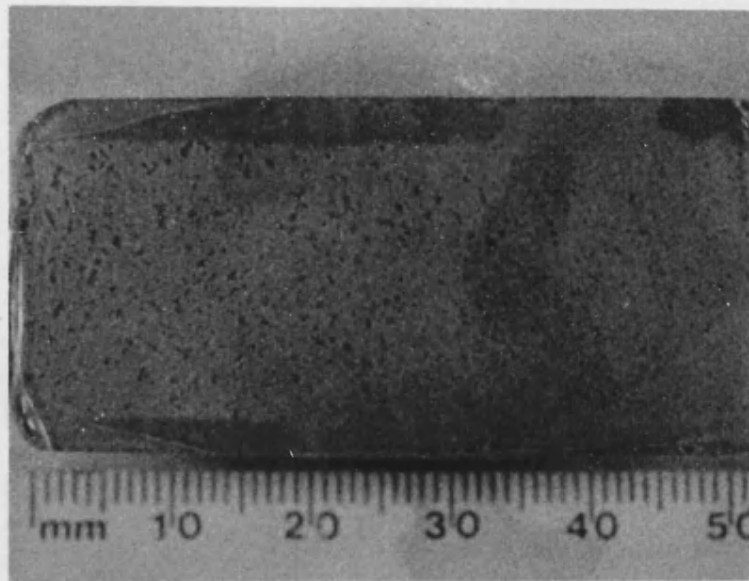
Trapped/outgassed air visible through a glass slide adhesively bonded to a specimen of FPL-etched A357.
